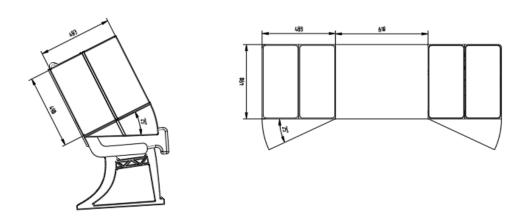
Sketch of passenger seat and padded cushion with dimensions
